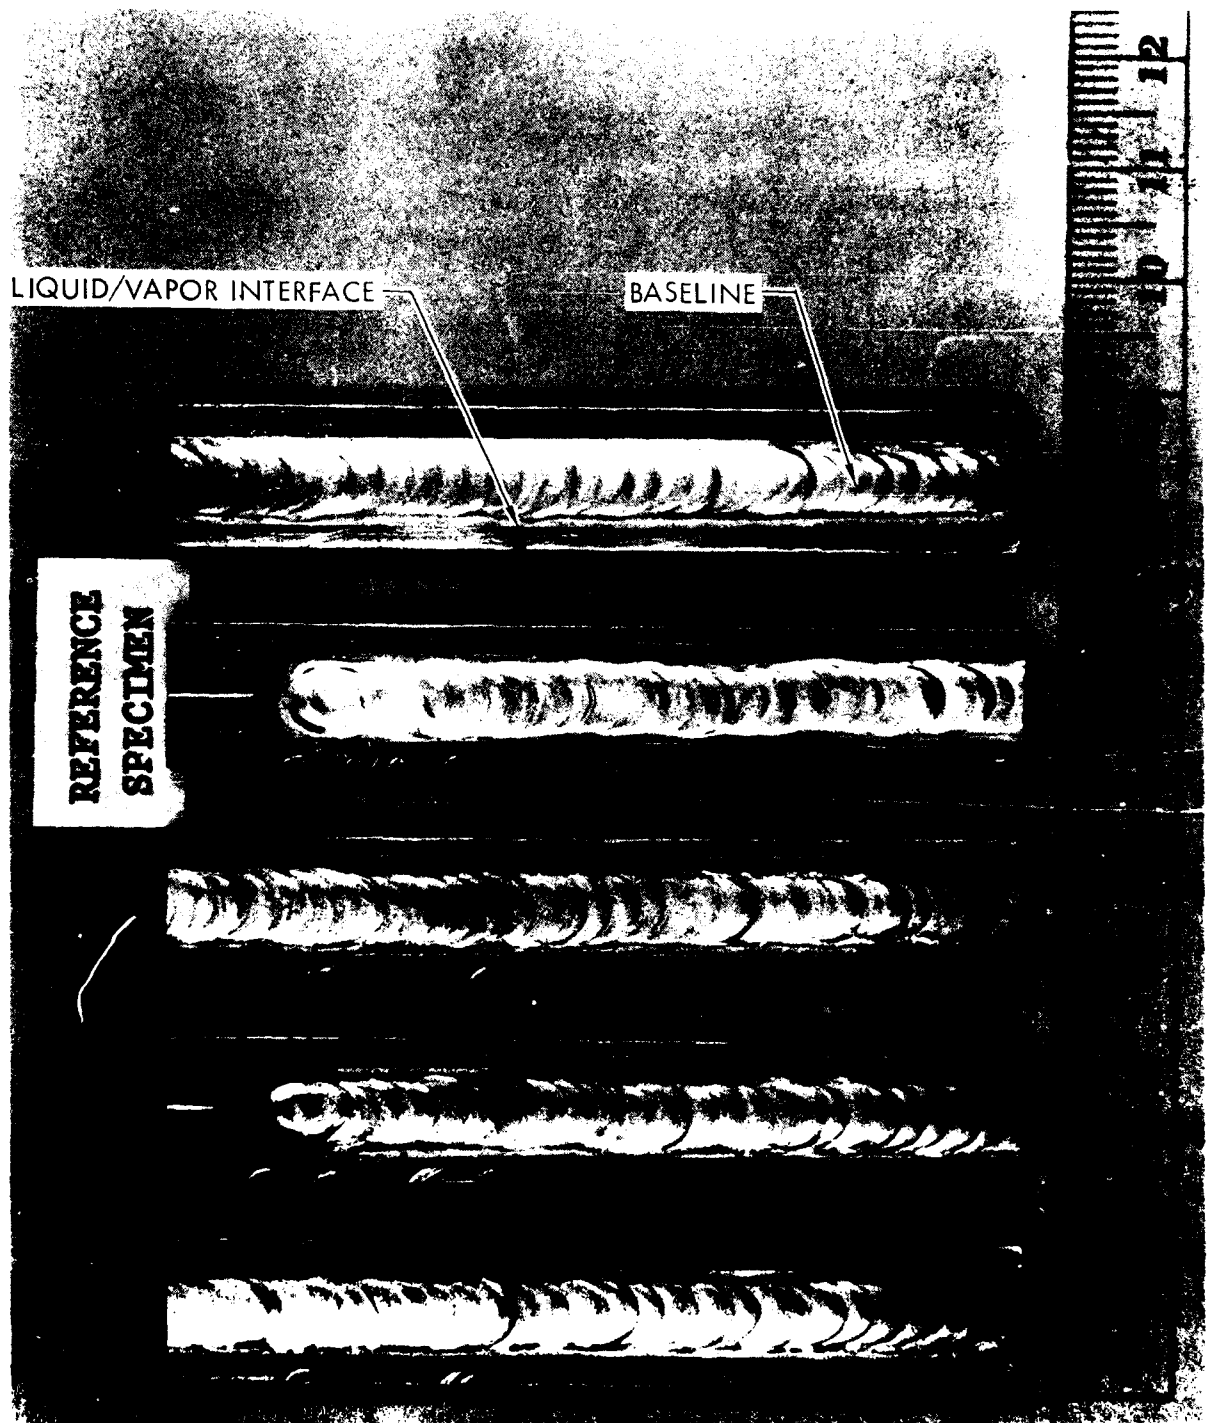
Aluminum Alloy Type 5086 Specimens: Posttest
